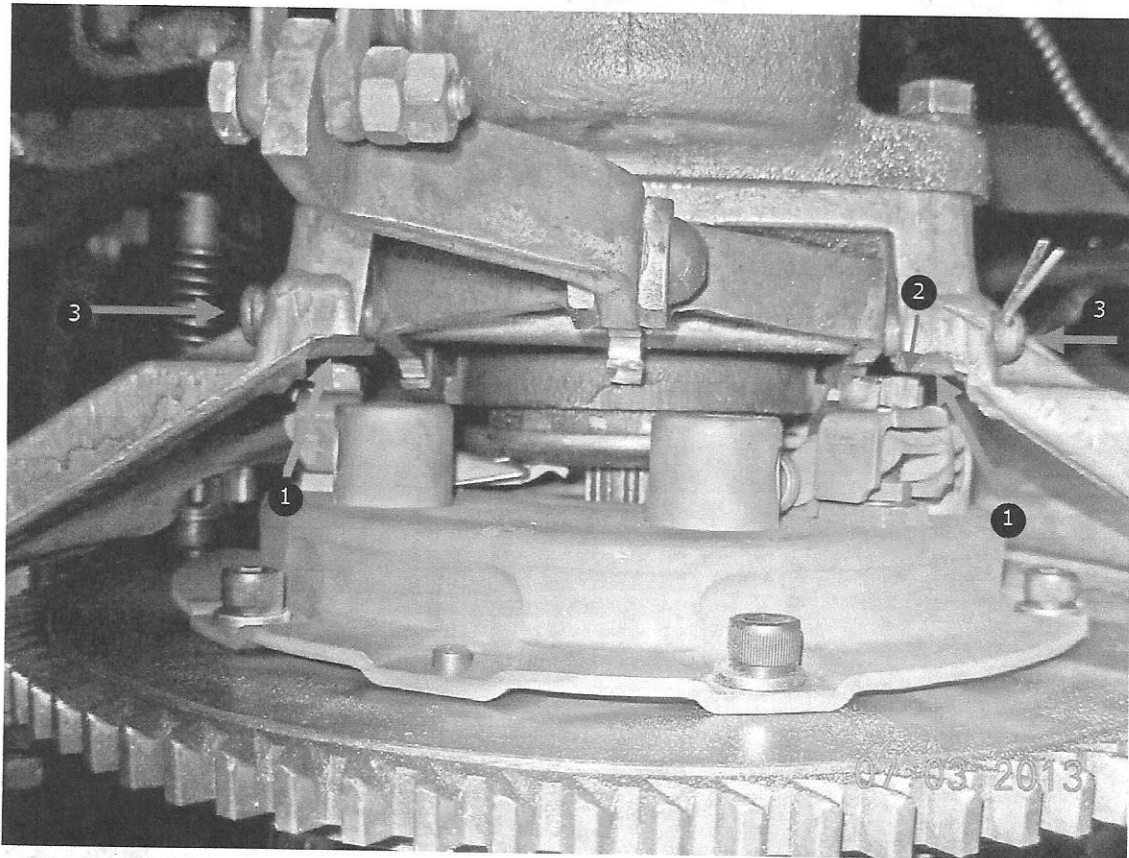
Clutch Disengaged #1 arrows show flywheel housing material removal area giving clearance for clutch finger hold down nuts. #2 arrow shows clearance gap between hold down nut and flywheel housing. #3 arrows point to ends of throwout fork hinge pin. Trial fit-up of parts revealed interference between the clutch finger hold down nuts, and the flywheel housing. The interference region of the flywheel housing was the two thickened sections where the throwout fork hinge pin is mounted. To assure adequate clearance, you must allow for the hold down nuts which move farthest from the flywheel when the clutch is disengaged (clutch pedal fully depressed).
